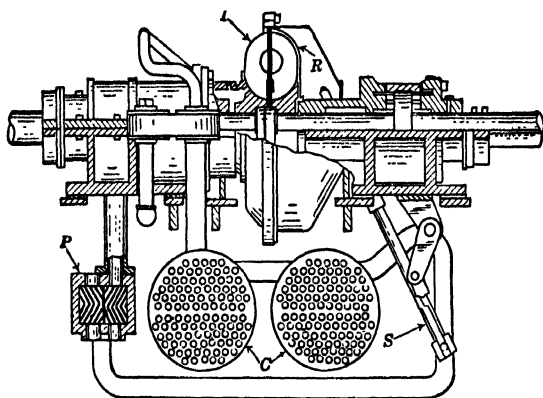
Cross section through 3600 rpm adjustable-speed fluid drive for boiler feed pumps. *R* is runner; *I*, impeller; *P*, oil pump; *C*, oil coolers; *S*, speed controller. (Courtesy of American Blower Corp.)
